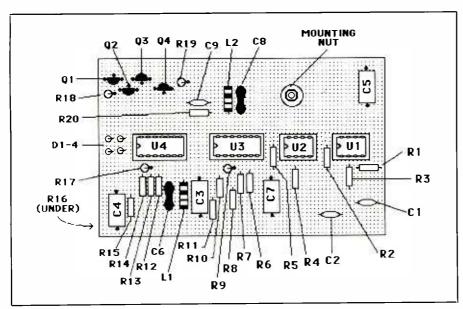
Suggested component layout for main transmitter circuitry on perforated board.
